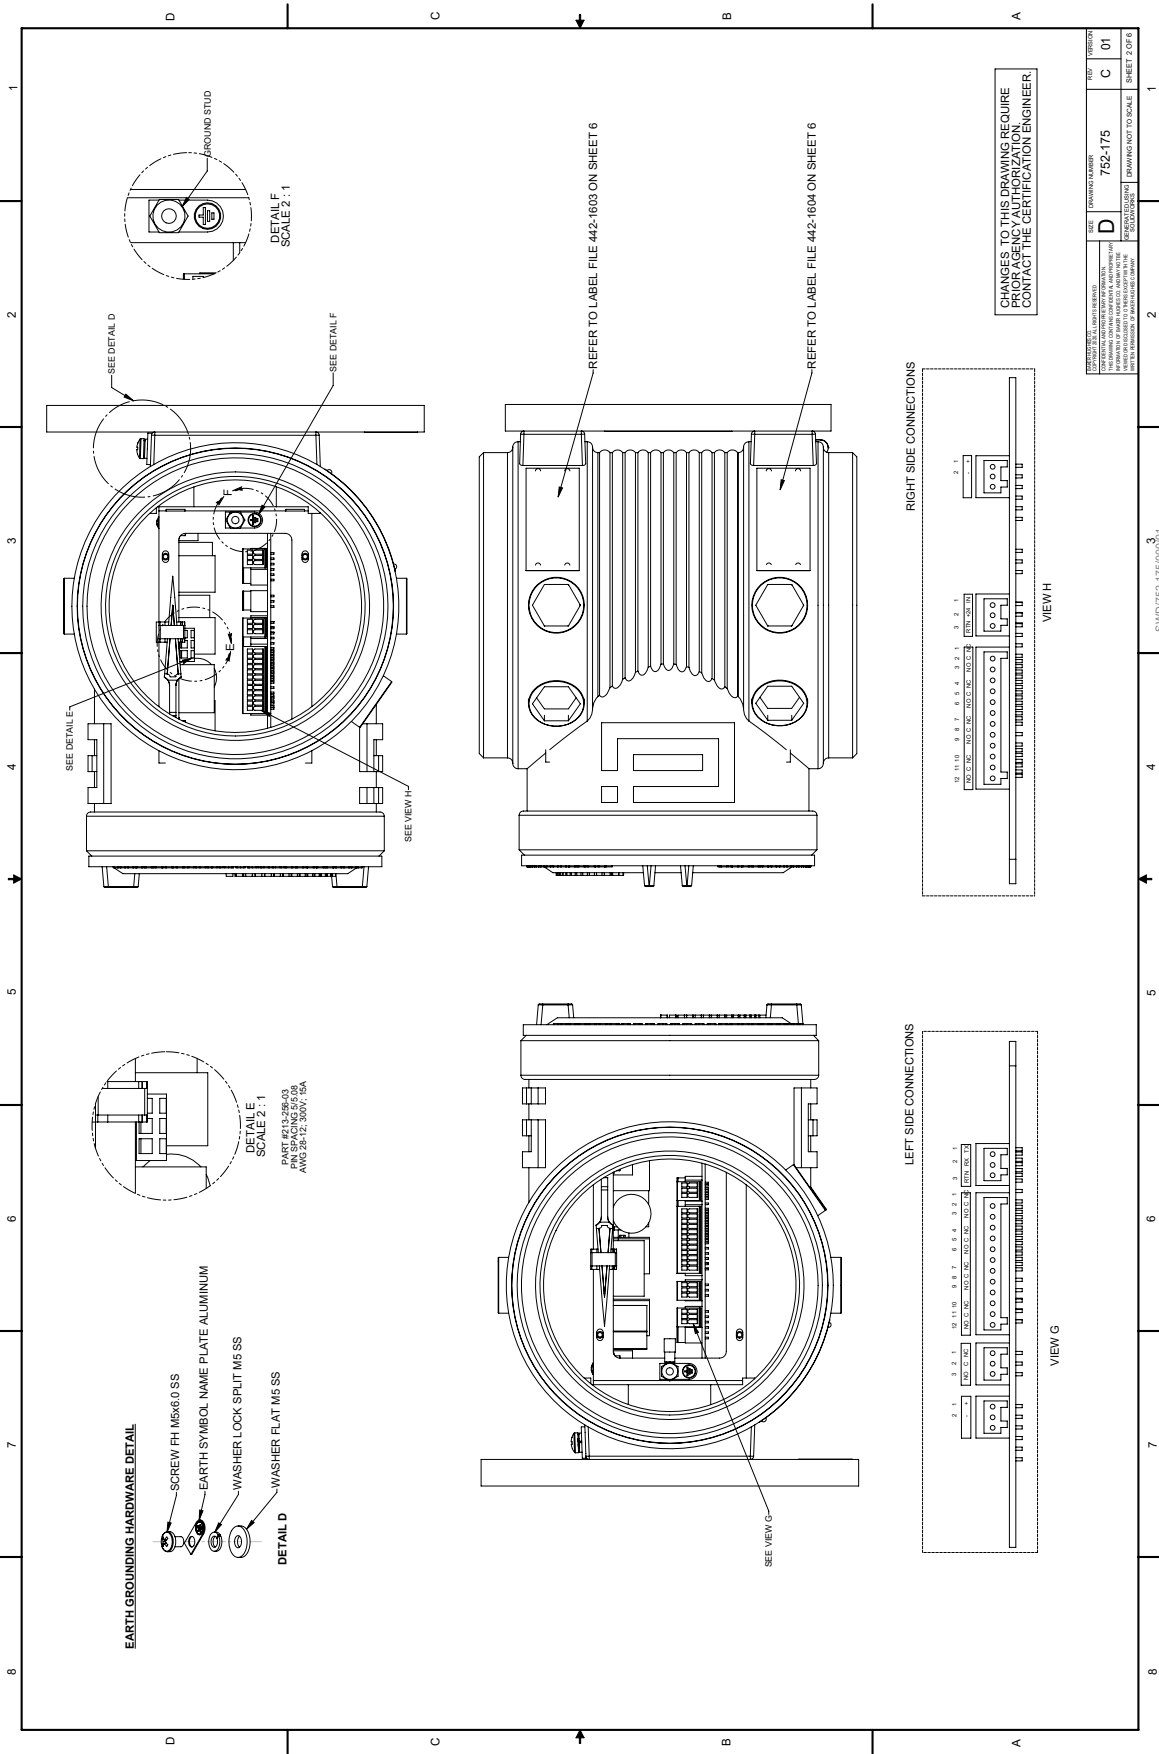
XDP certification drawing, Cenelec (752-175revA, sheet 2 of 6)
